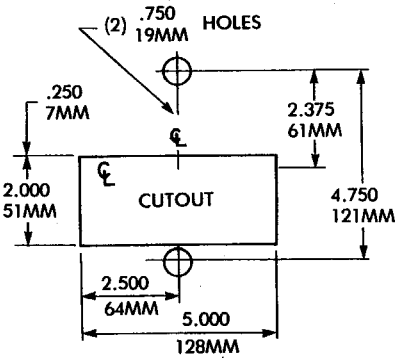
Panel drilling for surface mounting for Type C1 case relays on panels no larger than 0.188 in. (5mm) thick
